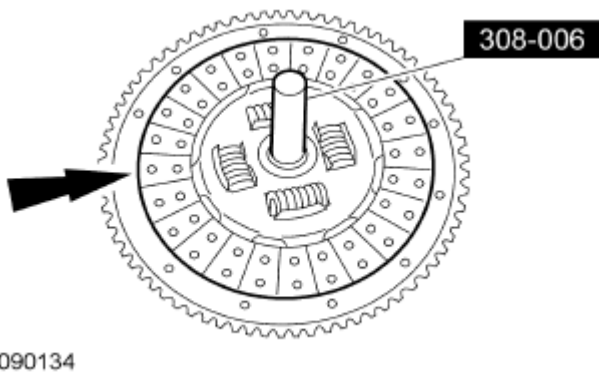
Locating Clutch Disk Aligner & Clutch Disc
